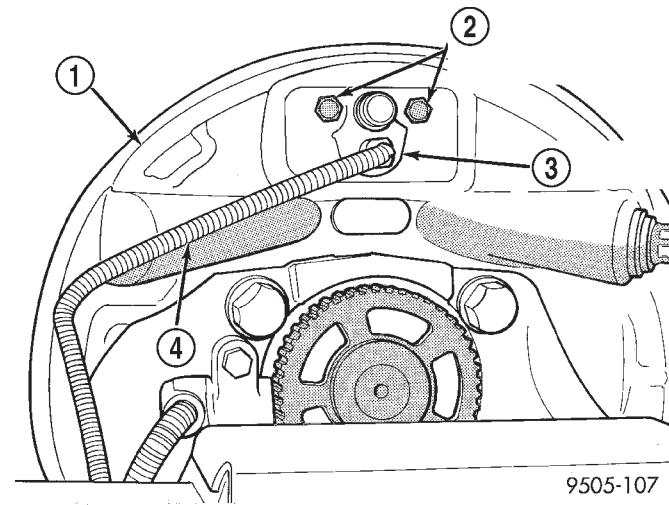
Brake Hydraulic Tube At Wheel Cylinder
